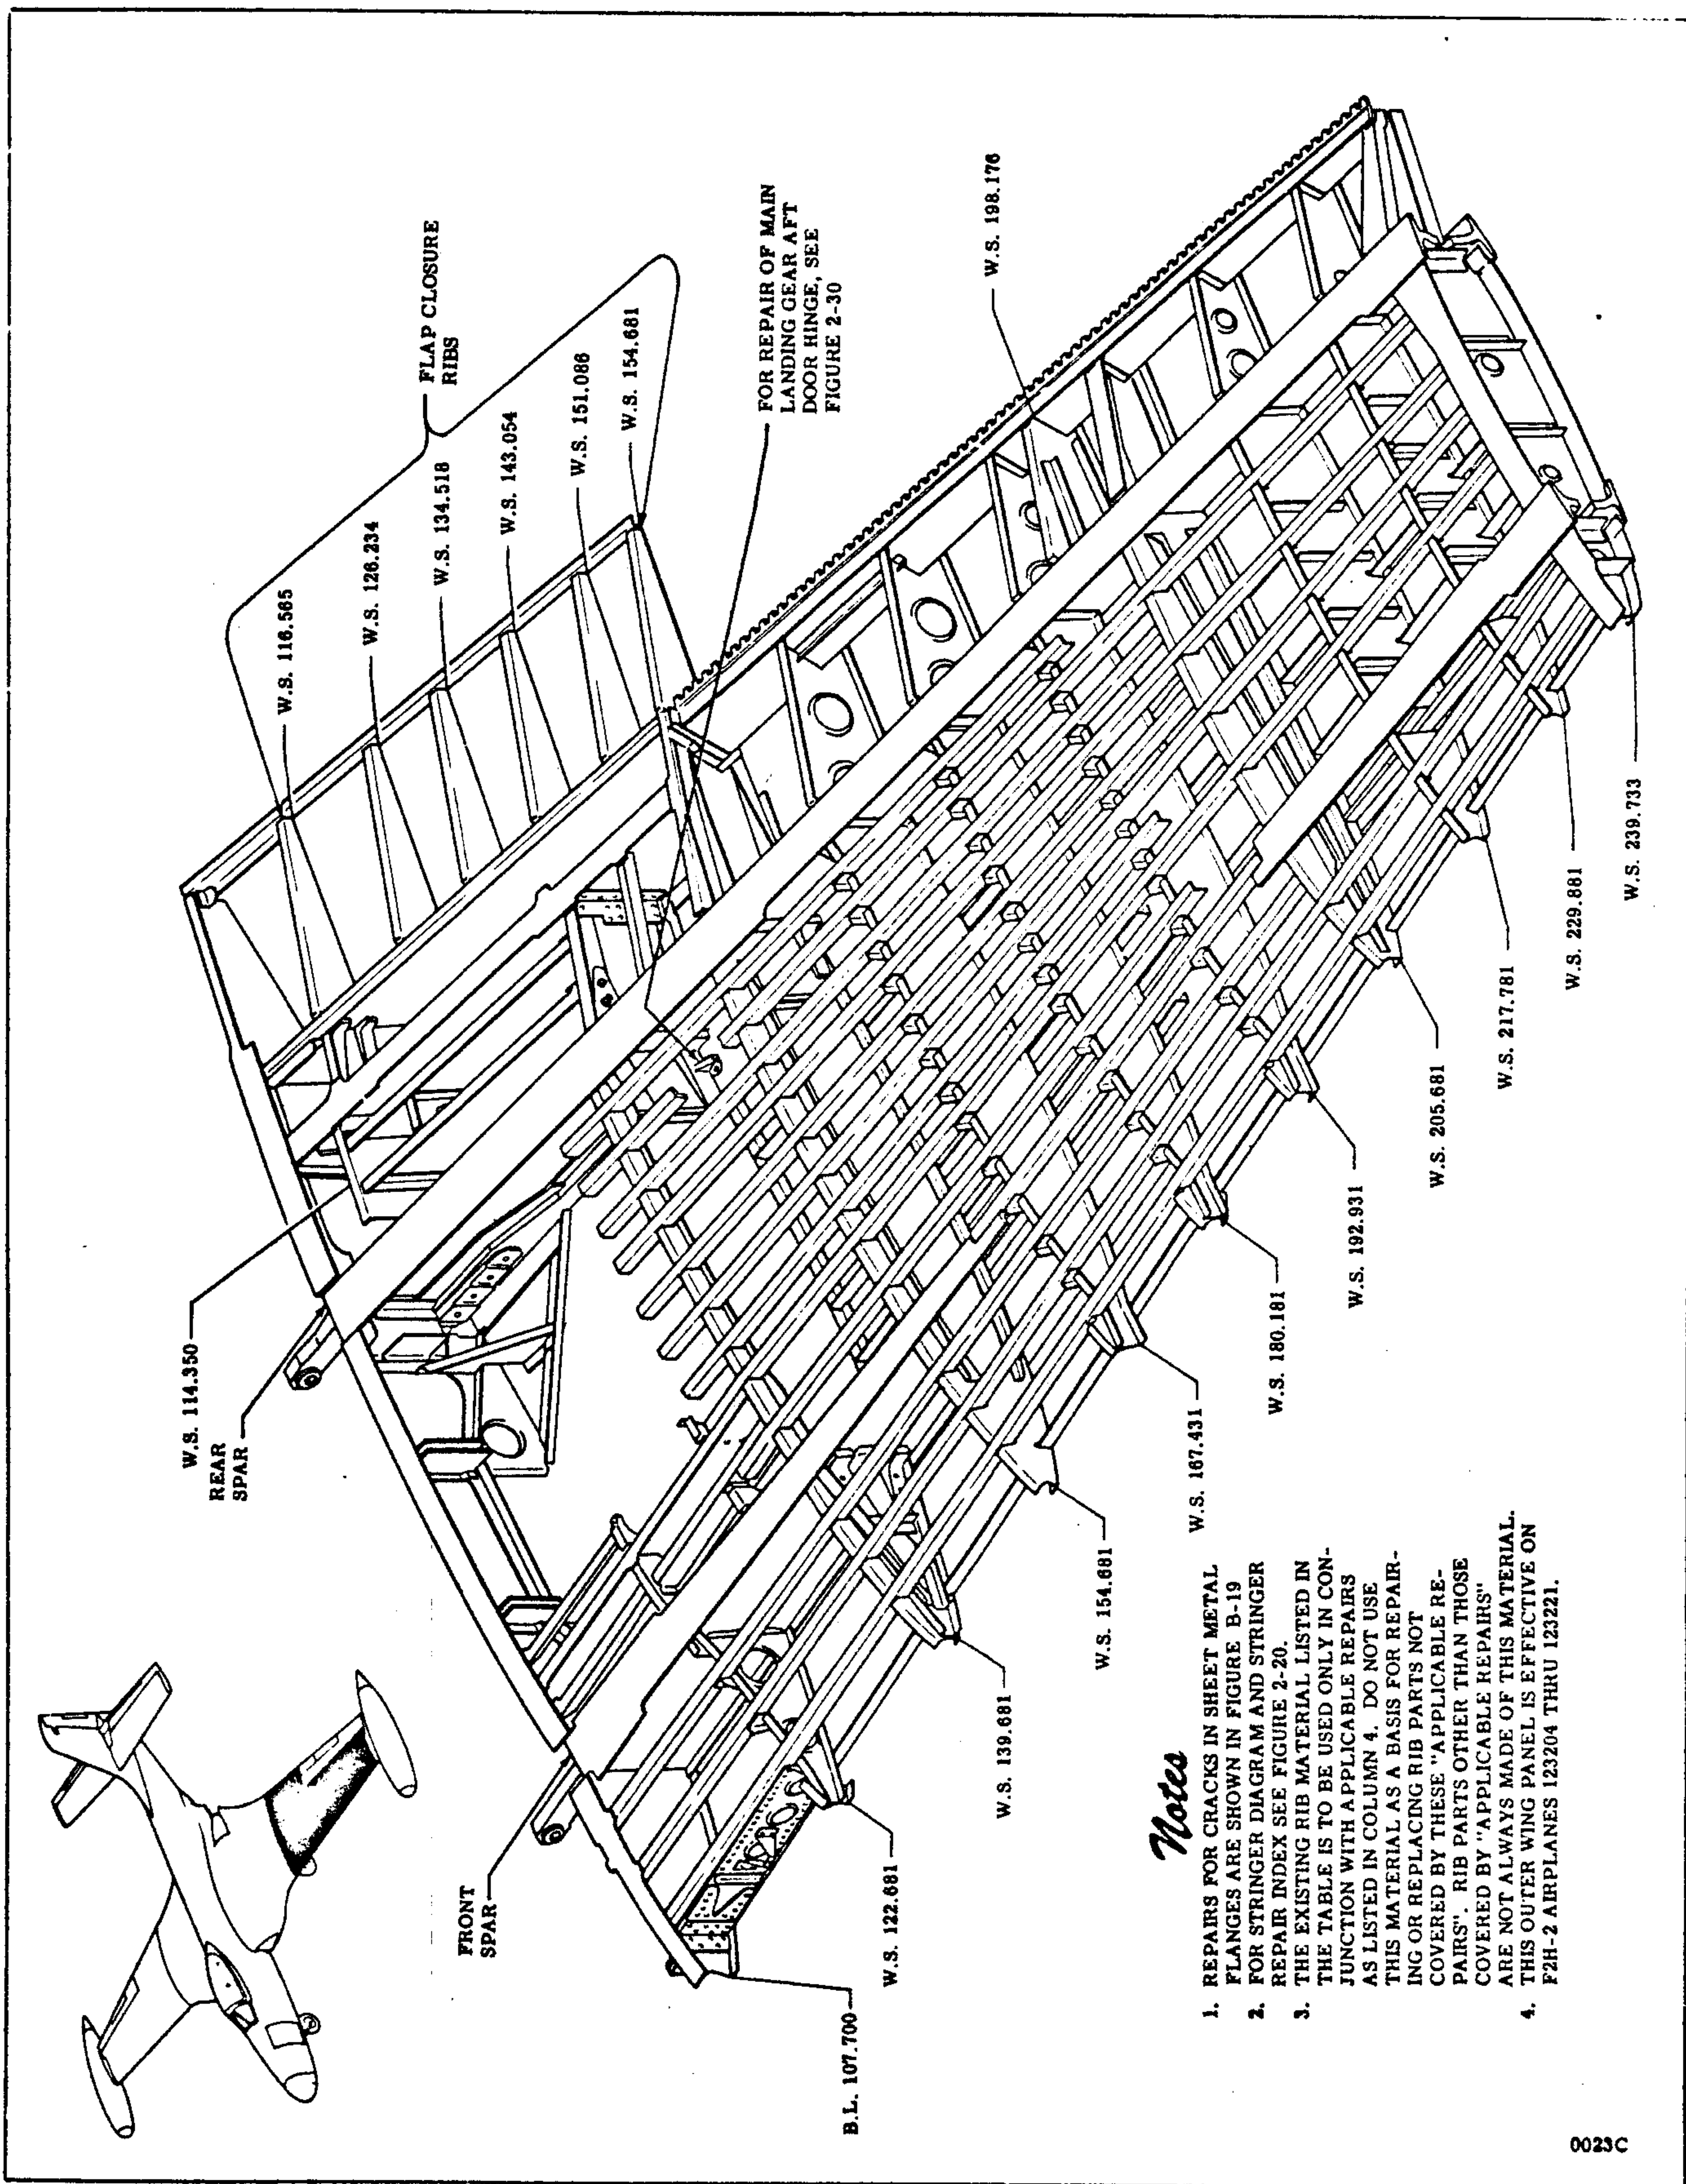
Wing Outer Panel Structure. F2H-2 Airplane (Sheet 1 of 2 Sheets)
